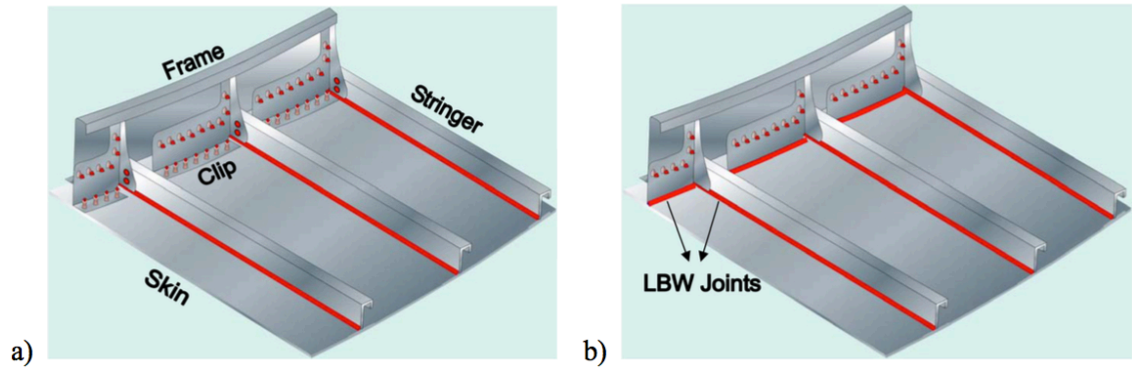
a) the application of LBW to the currently used panels with welded skin-stringer joints, b) possible future application of welding for clip-skin joints (50, p. 2)
